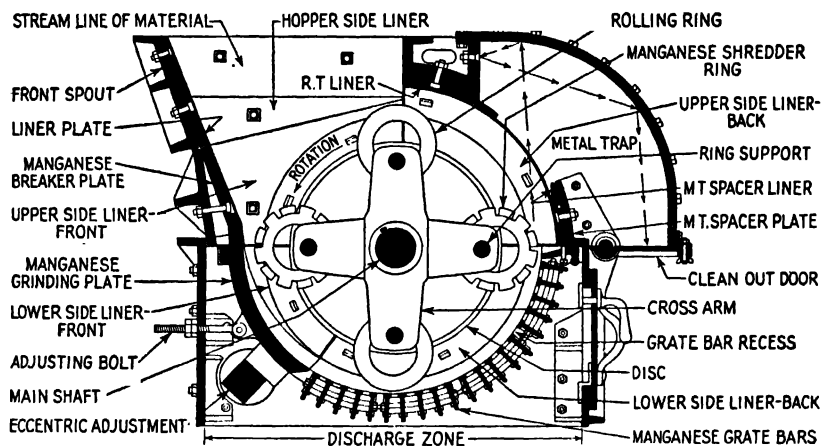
Rolling Ring Mill. Courtesy American Pulverizer Company, St. Louis, Mo.
